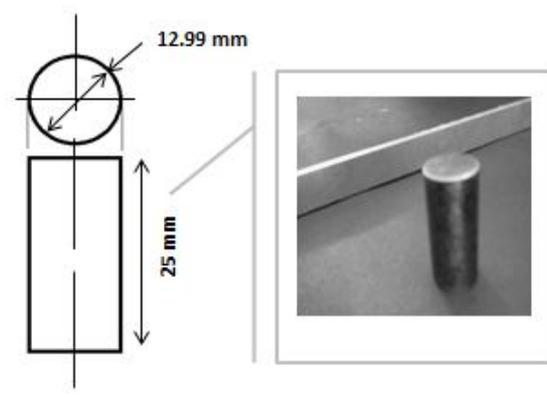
Geometric layout and camera view of the blunt cylindrical projectile
